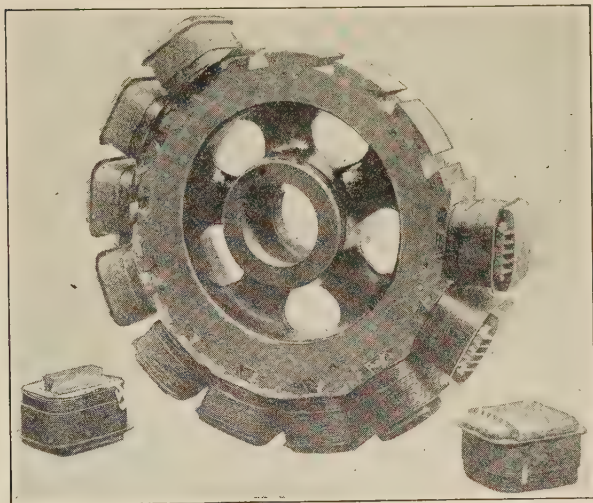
Rotor of a horizontal shaft moderate speed alternator.
